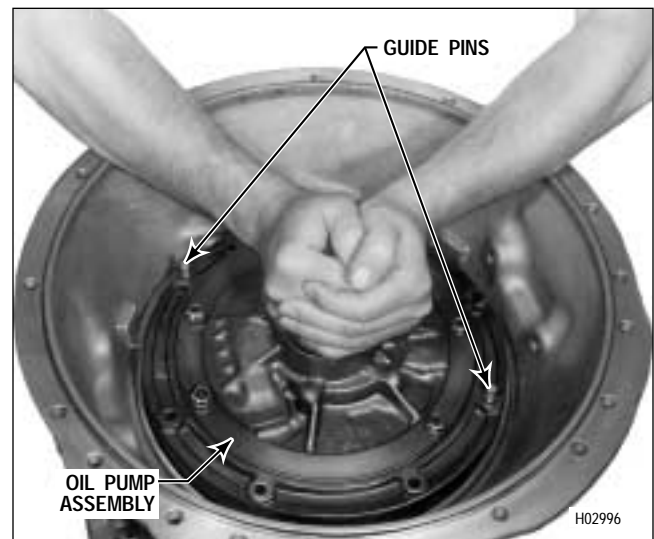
Installing Oil Pump Assembly (Models Without Retarder)
